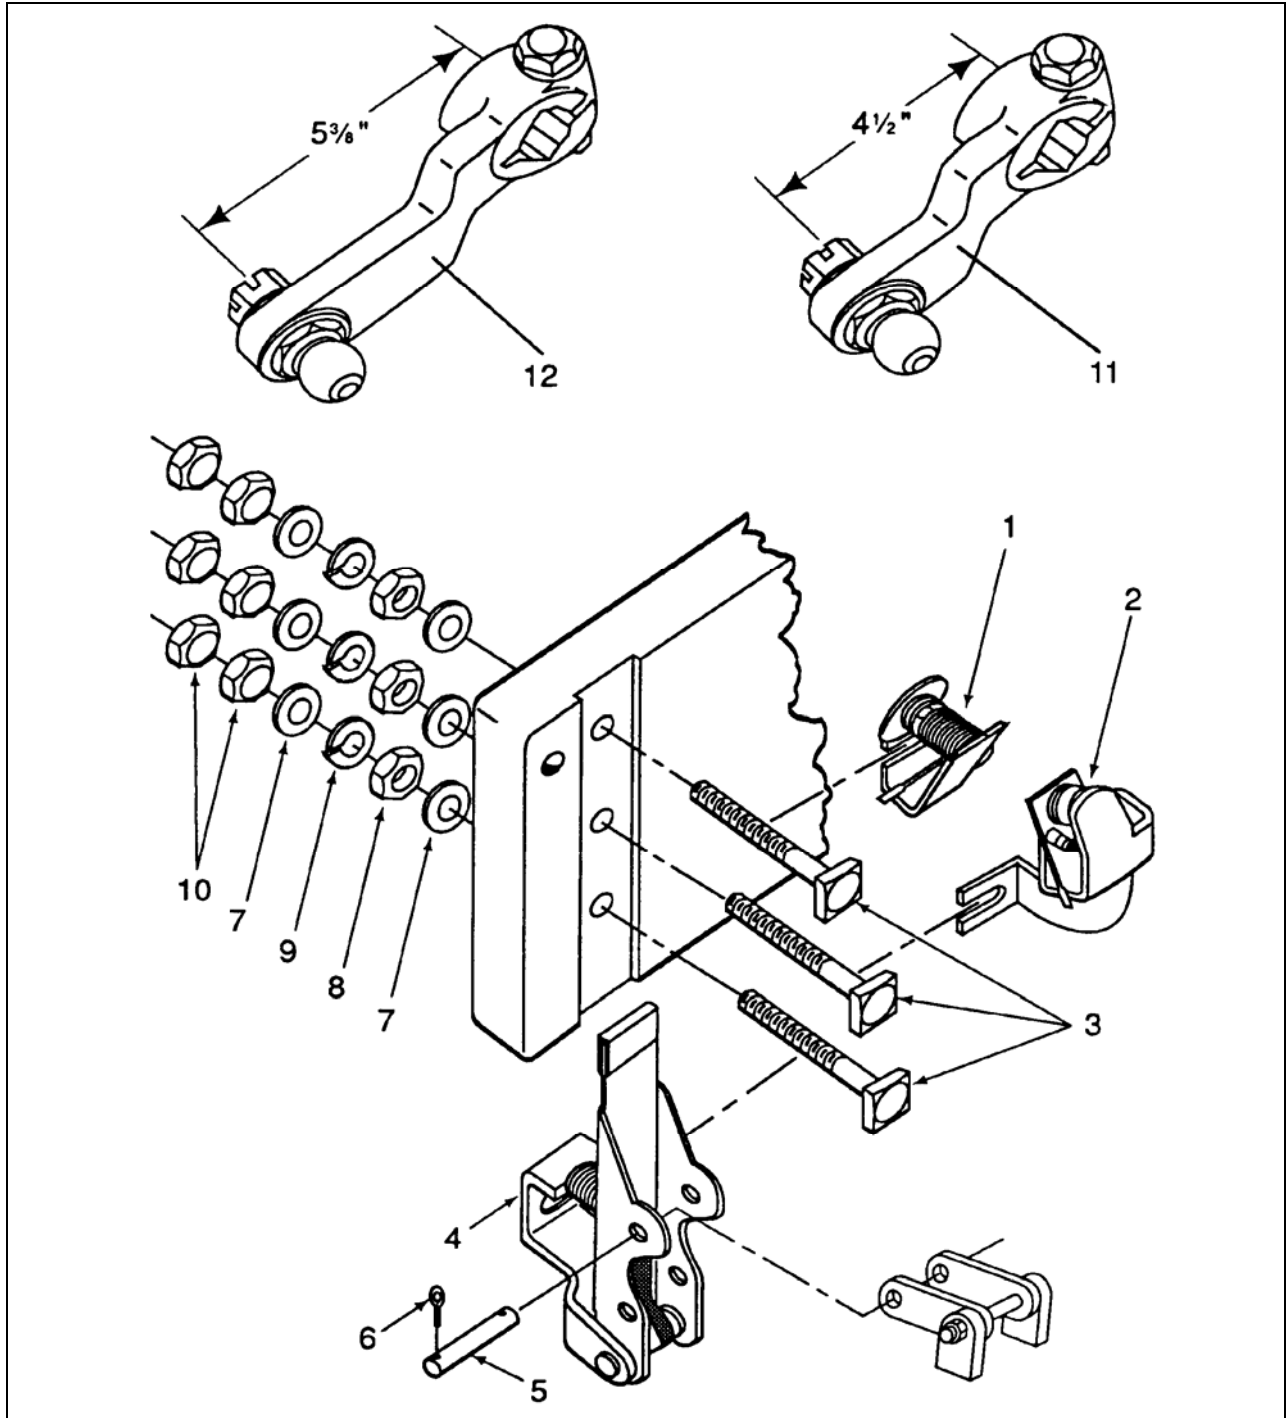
Model 7K Controller Contact Assembly and Crank Arms
